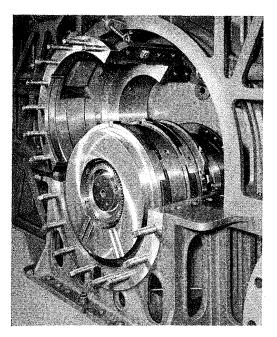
Six-shoe thrust bearing at forward end of reduction gear for steam turbine drive. Courtesy The Falk Corporation.
